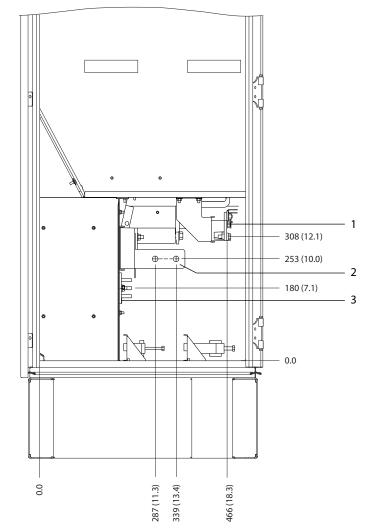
Terminal Dimensions for F12–F13 Inverter Cabinet, Front View
